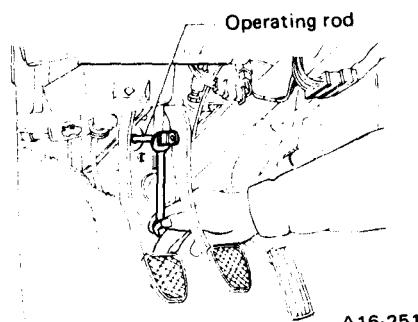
Tightening lock nut on operating rod ASSY A16-251
